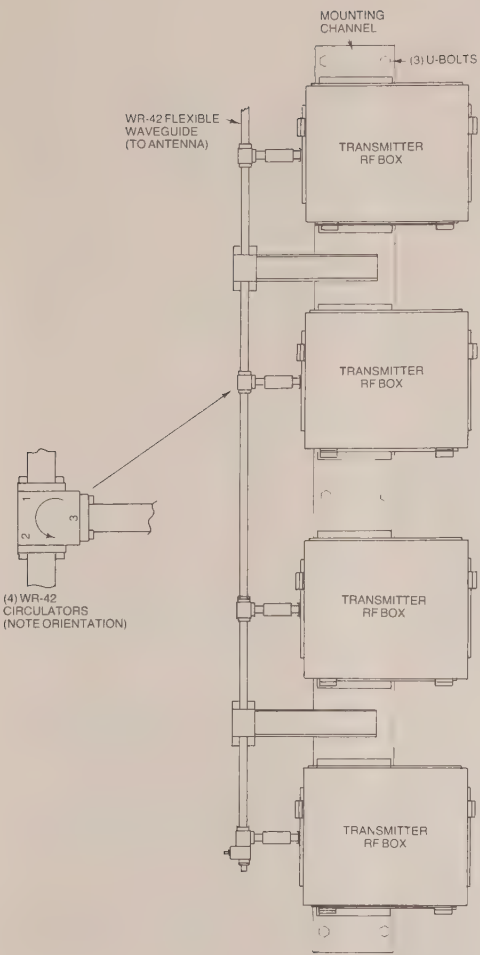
Stacking/Combiner Kit – 4 TX Channels
